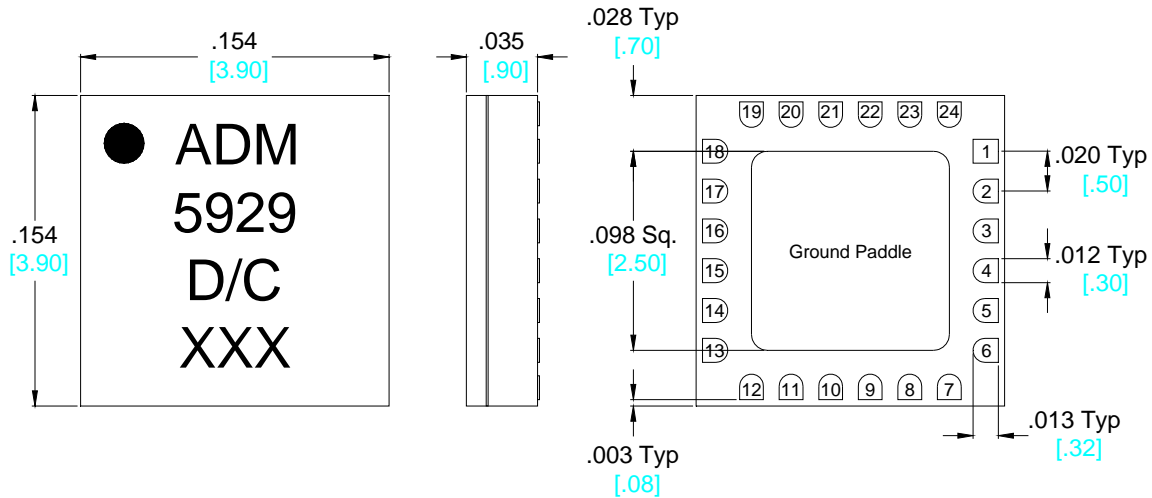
A drawing of a 4mm QFN package. Alternate dimensioning: [mm]
